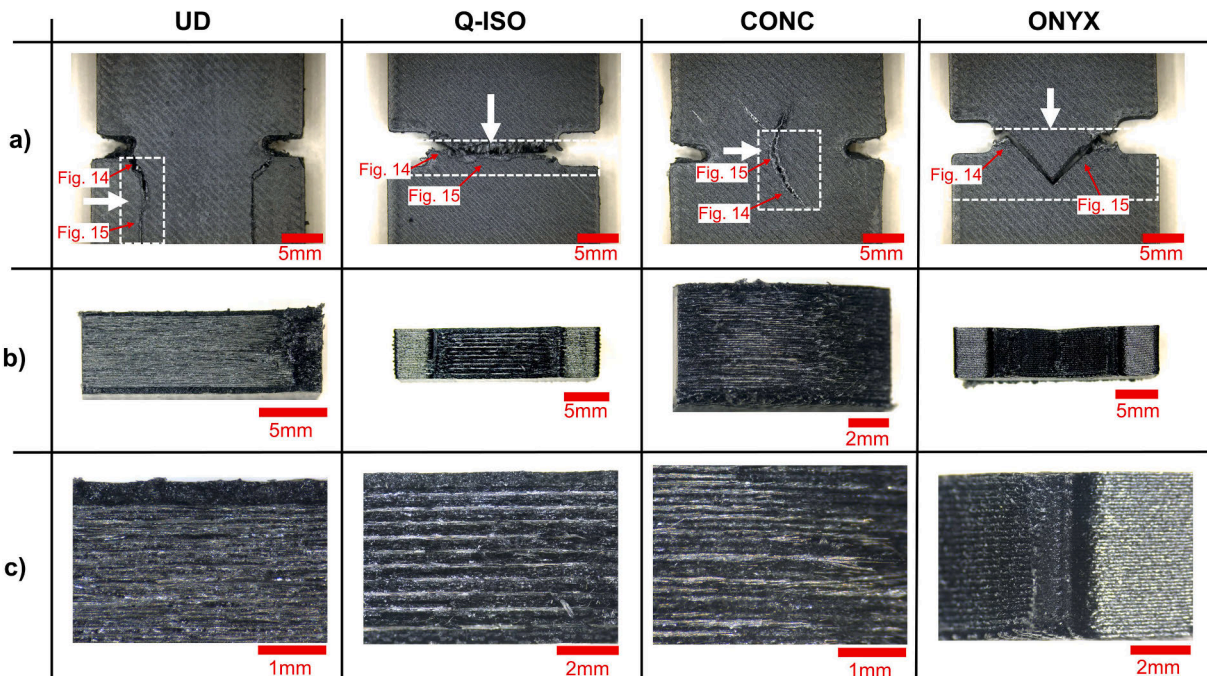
Position of examined fracture surfaces of the samples.
